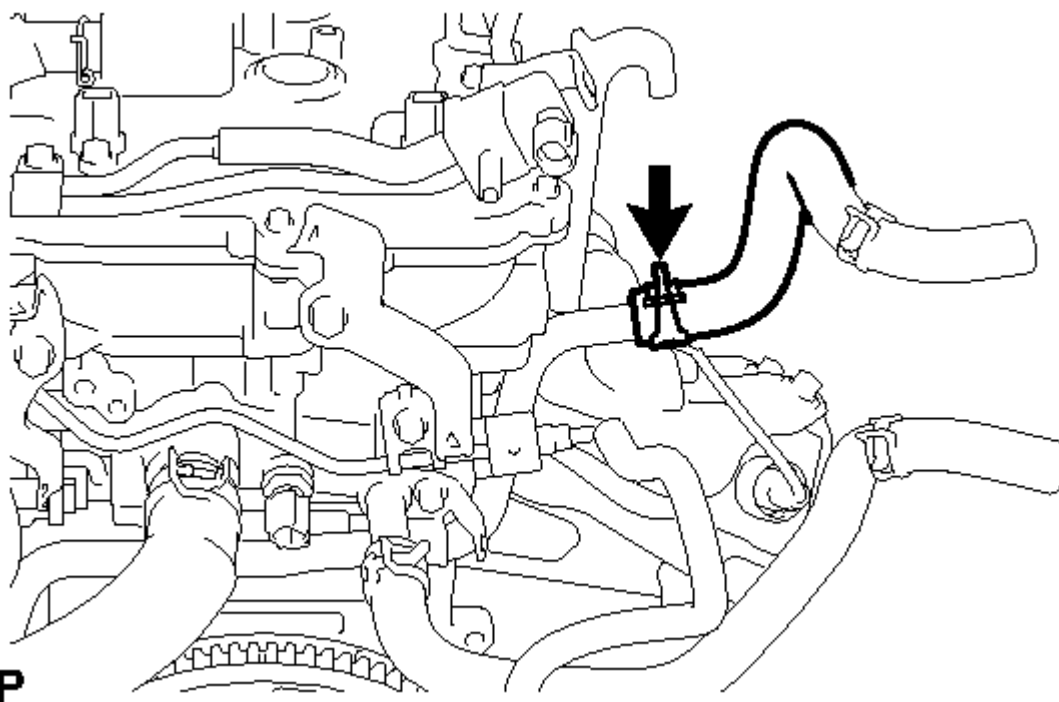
Identifying Heater Water Outlet Hose A Clip
